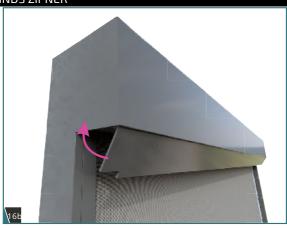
Application of mounting in the case of: Zipner 90 Slim.Apply the inspection part of the cassette.
